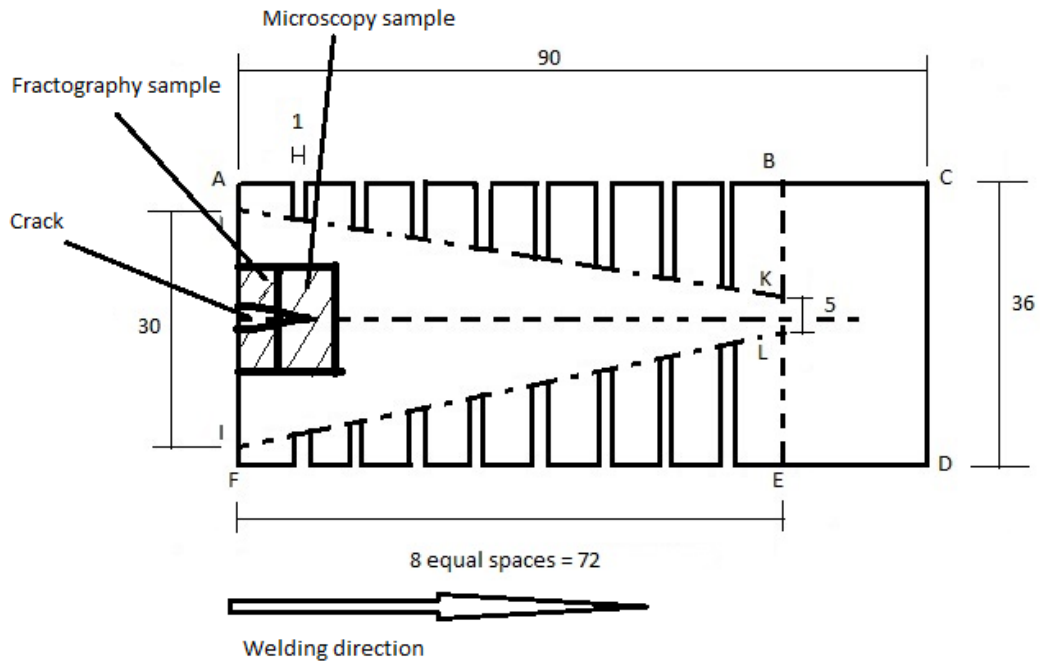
Schematic diagram showing sectioning for fractography and microscopy samples.
